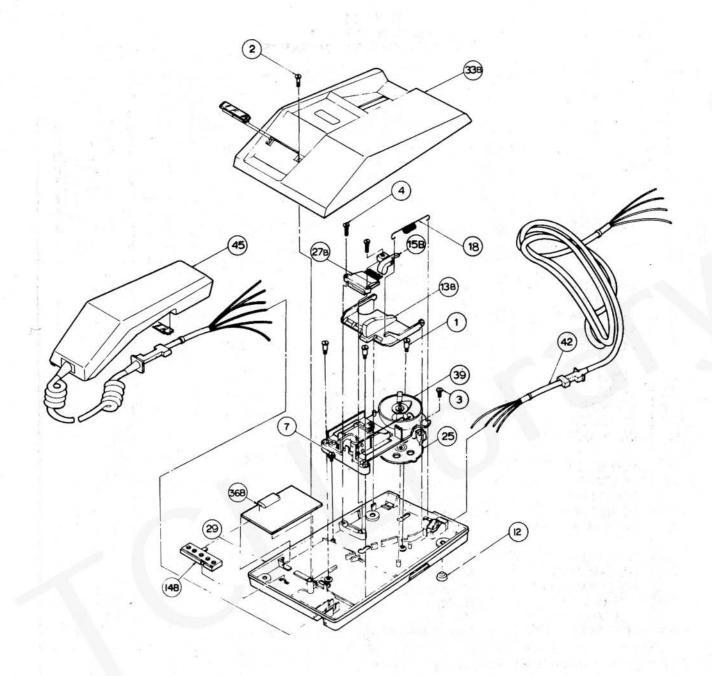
Exploded view - QSKE2100A and QSQE2100A Type Telephone Sets
